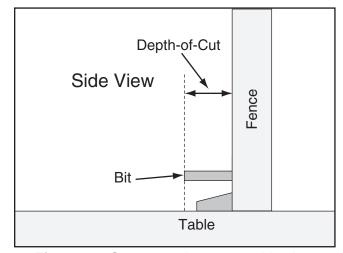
Groove cutting setup, side view (guard removed for clarity).
